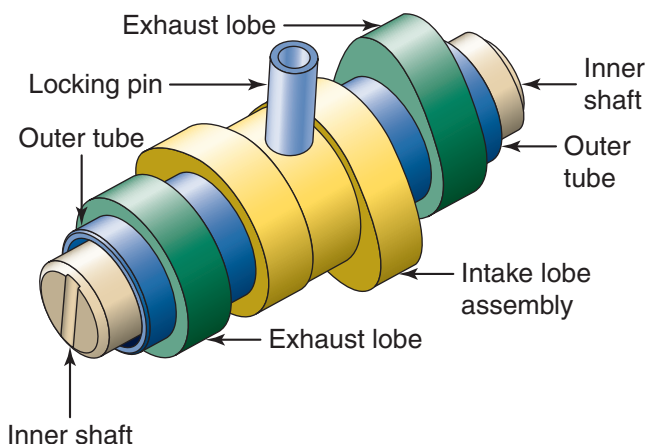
The basic construction of the camshaft within a camshaft used for variable valve timing on an OHV engine.
